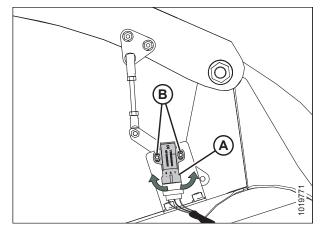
Reel Height Sensor – Right Reel Arm (Reel Up)
